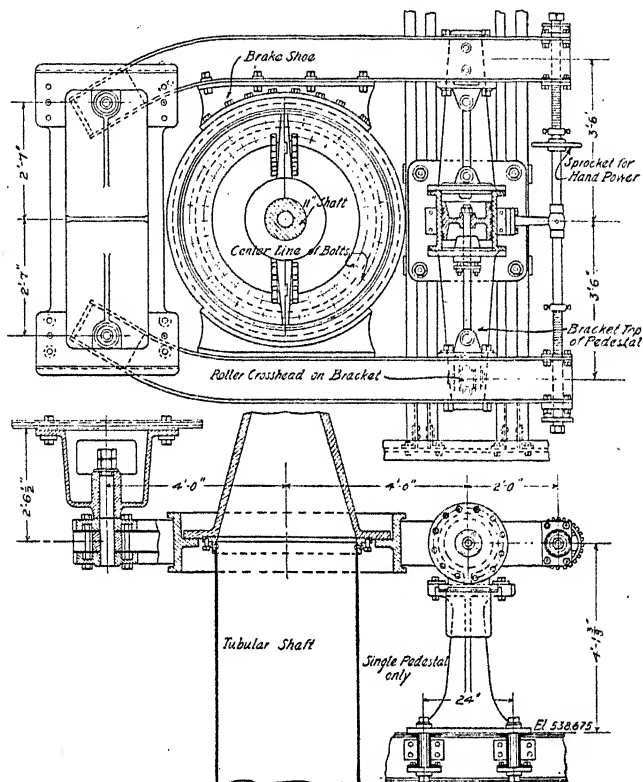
Brake on Main Shaft under Thrust-Bearing Girders
